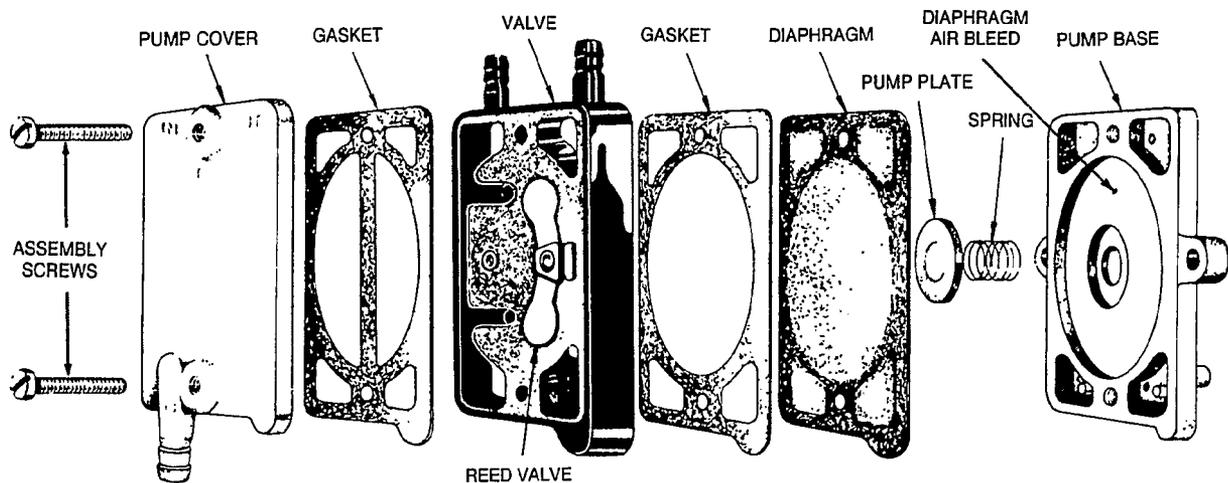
EXPLODED VIEW OF FACET FUEL PUMP
